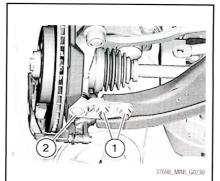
Unscrew nuts (1). Keep wheel control joint (2) to control arm
